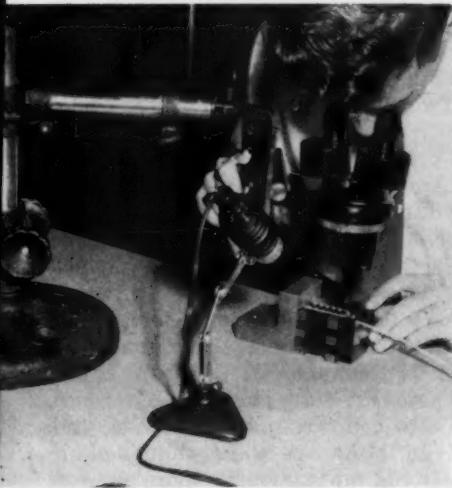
Finished parts are subjected to a micro-visual inspection to assure a proper entry of the port into the sleeve bore.
